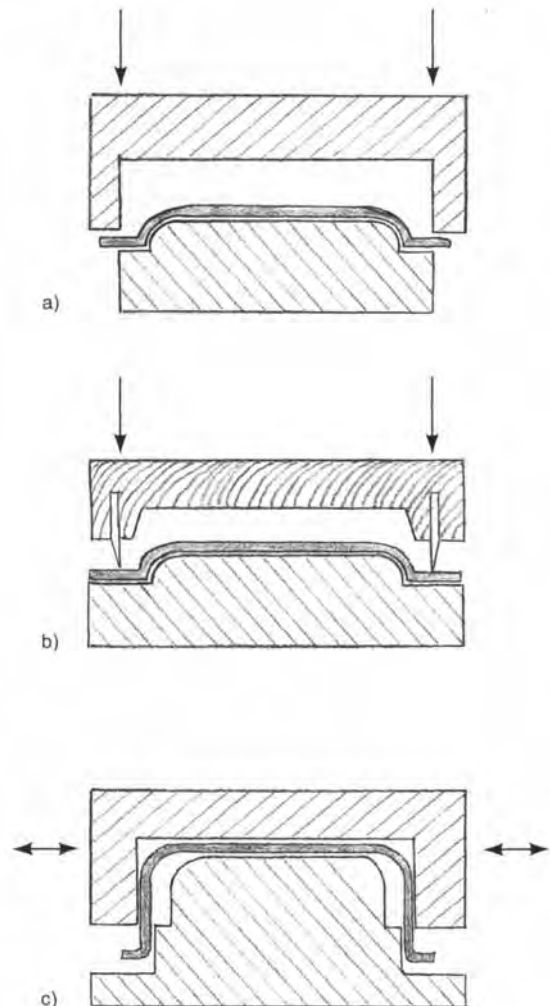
N7 Three different dies used to trim formed and molded plastics parts: a) A simplified view of a production blanking or trimming die, b) A steel rule die, c) The upper half of the die has a planetary movement in a side-to-side direction, to trim the side walls of the workpiece.
